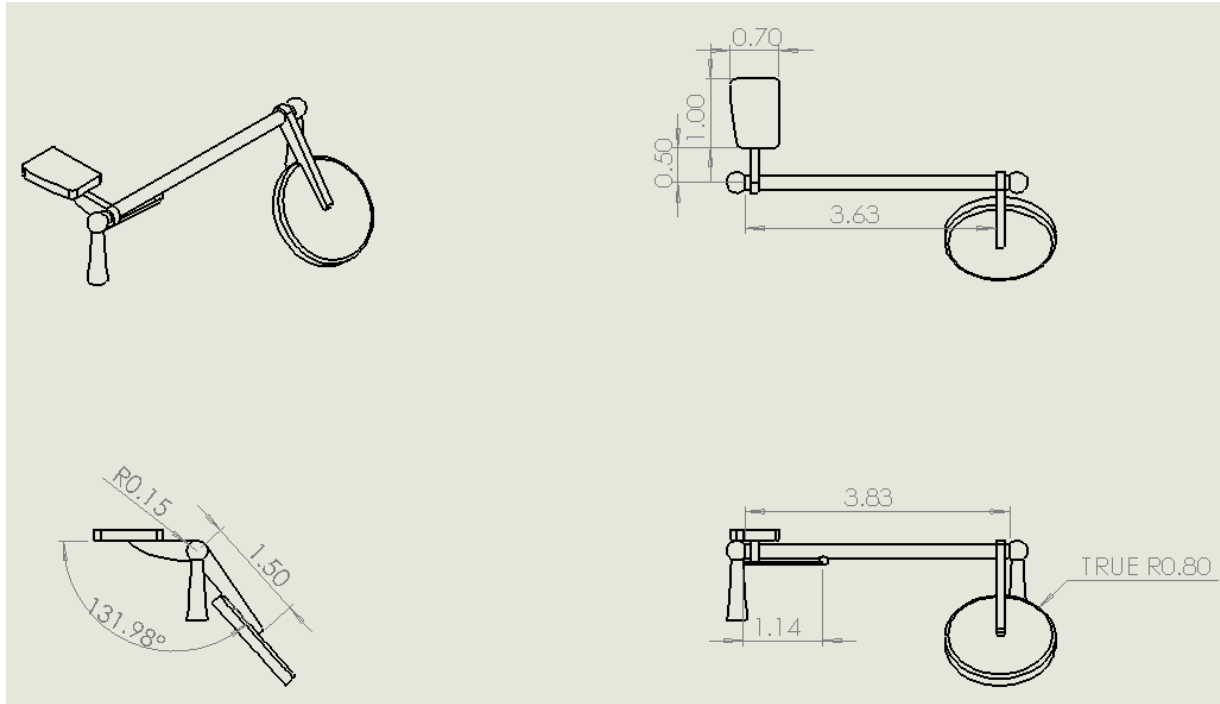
Engineering drawing of our machine element; this drawing provides measured values for the dimensions of the part.
